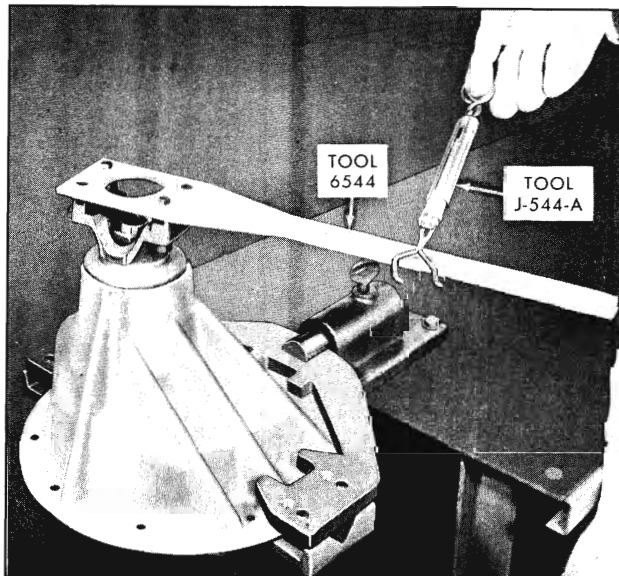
Measuring Bearing Preload With Spring Scale
